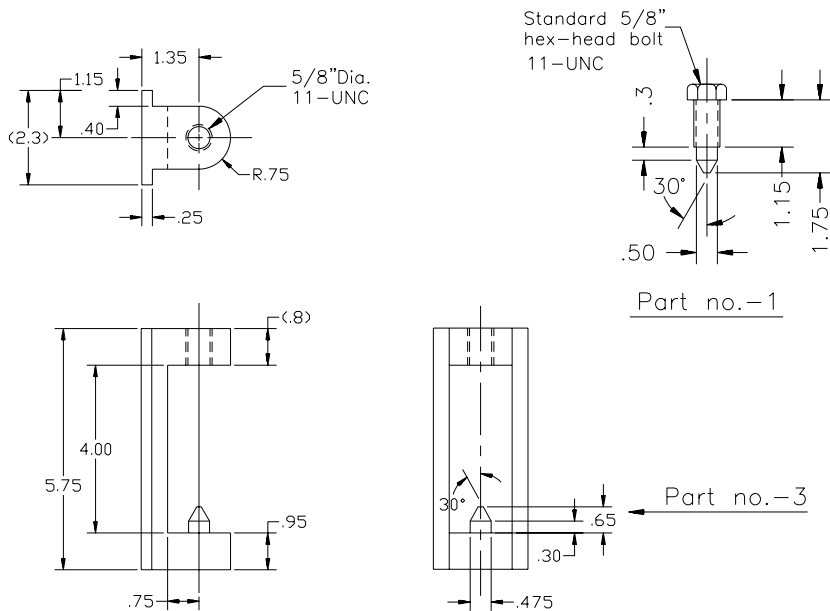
Detail drawings of Part Numbers 1 and 3
